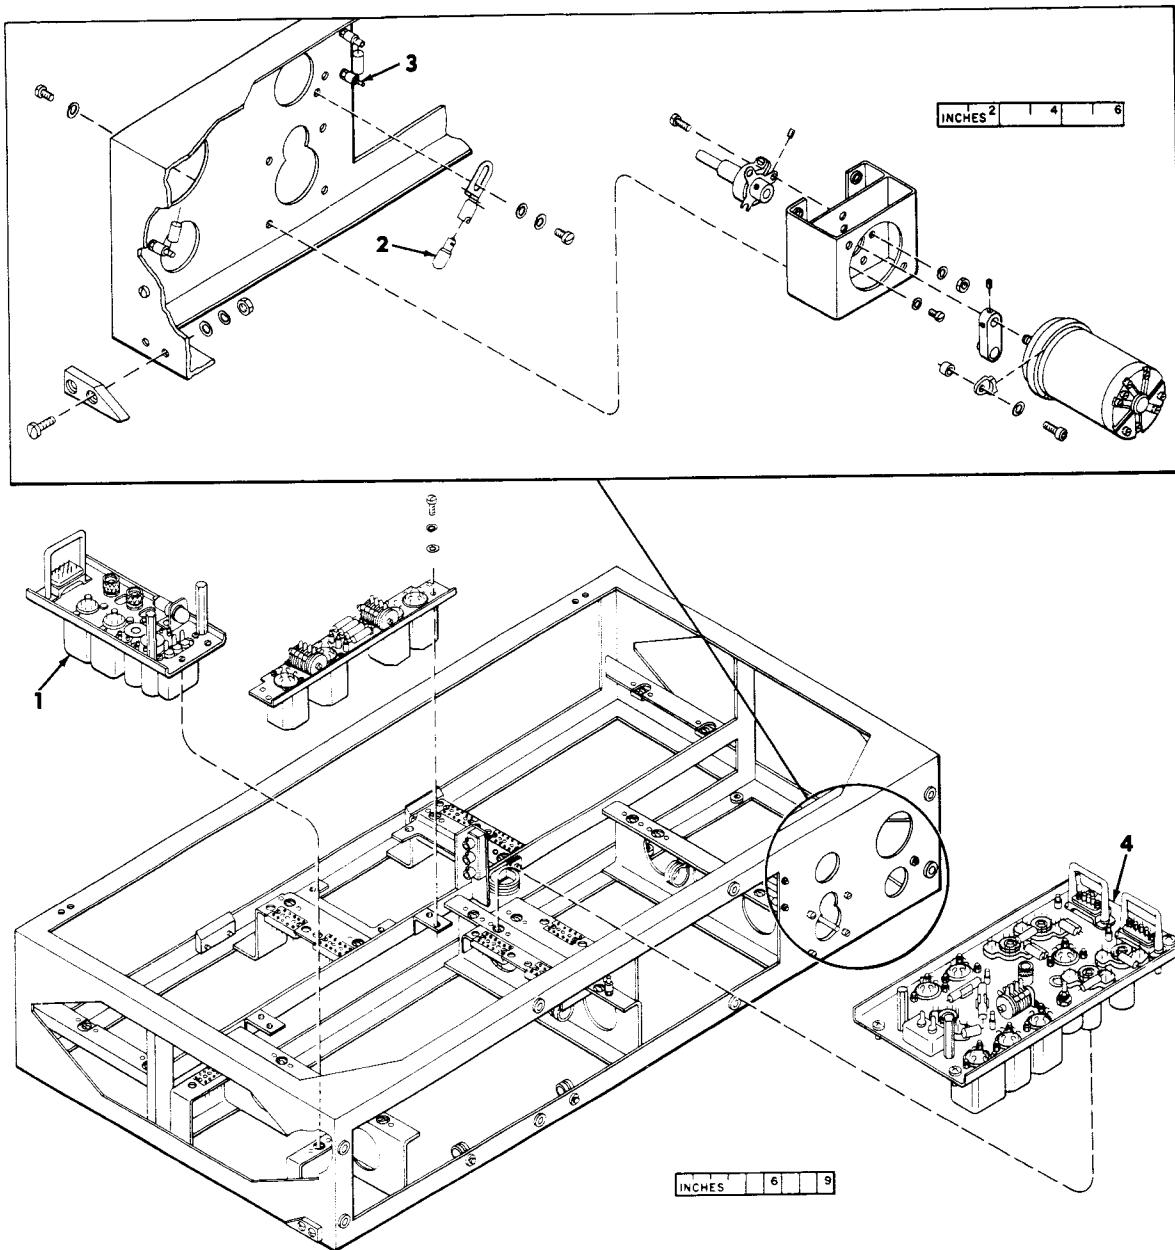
Amplifier, electronic control (9006949)—partial exploded view
